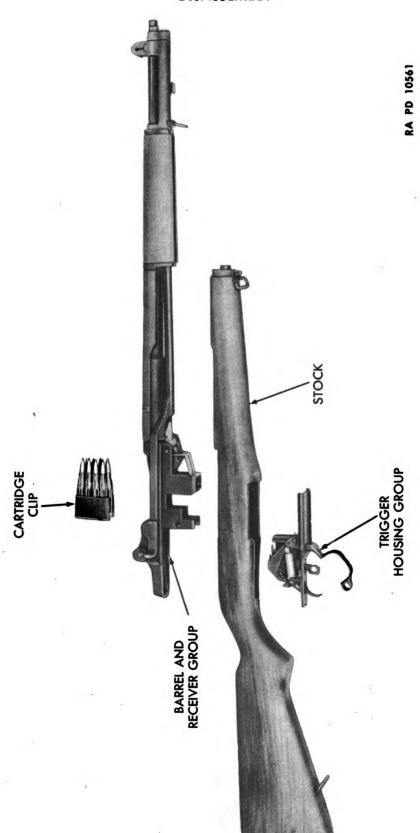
Barrel and Receiver Group, Trigger Housing Group, Stock, and Loaded Cartridge Clip
